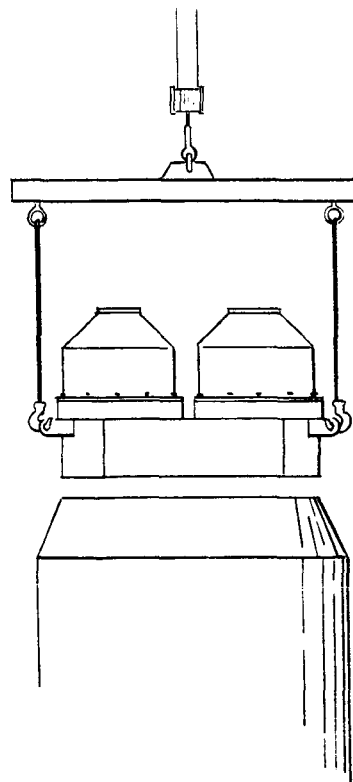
Installation of Voyager Spacecraft Aboard Booster
